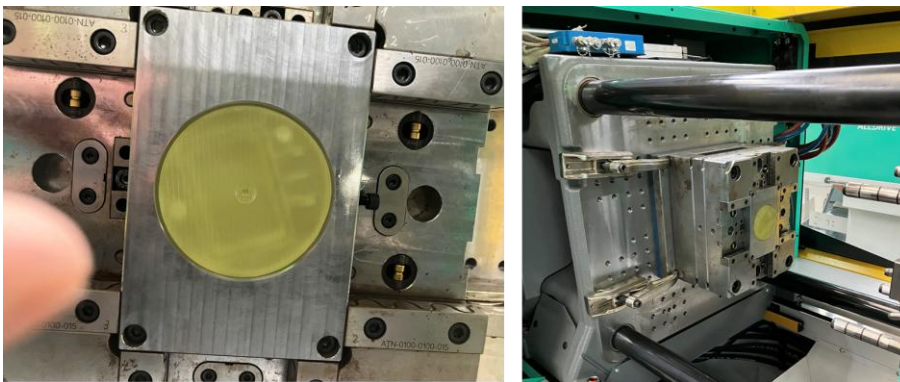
Printed mold placed in a holder which is fixed in an Arburg injection molding machine.
